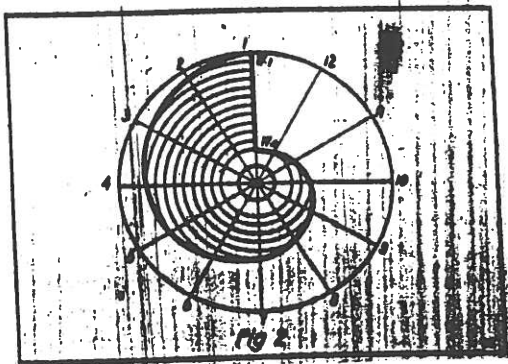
How the Volute-Shaped Disc, or "Snail" as Clockmakers Call It, Is Laid Out With the Aid of a Drawing Compass.
